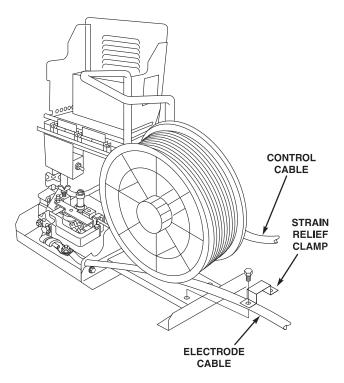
INPUT CONTROL CABLE AND ELECTRODE CABLE CONNECTIONS
